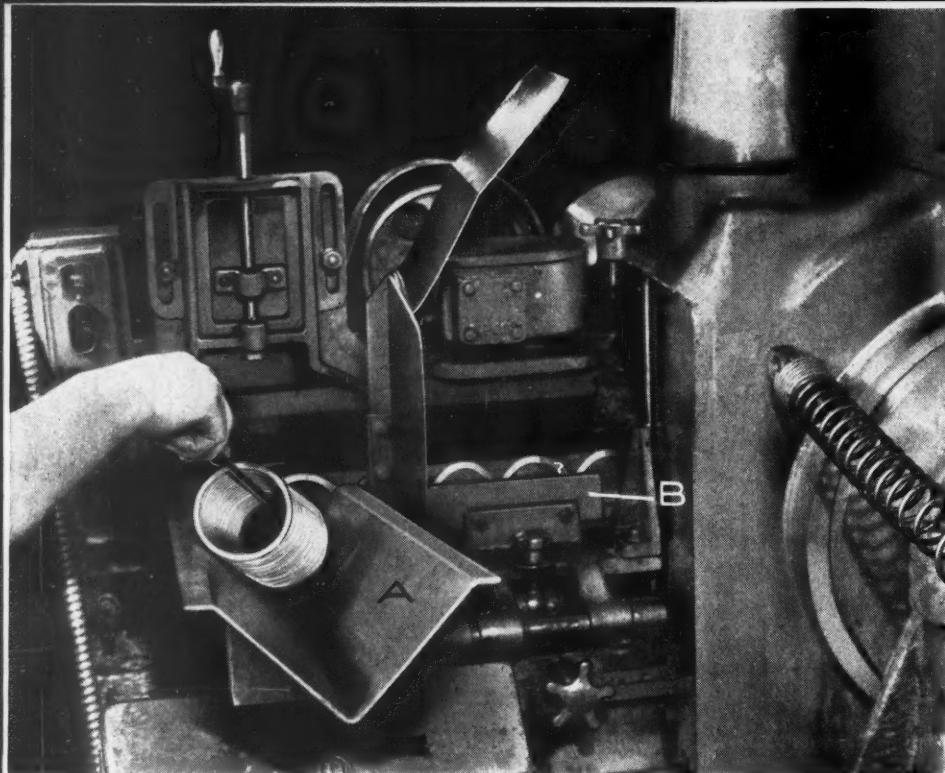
After the piston-rings have been loaded on inclined ramp (A), a chain with pick-up lugs carries them between two horizontal grinding wheels on a guide rail (B) in grinder shown in Fig. 8
